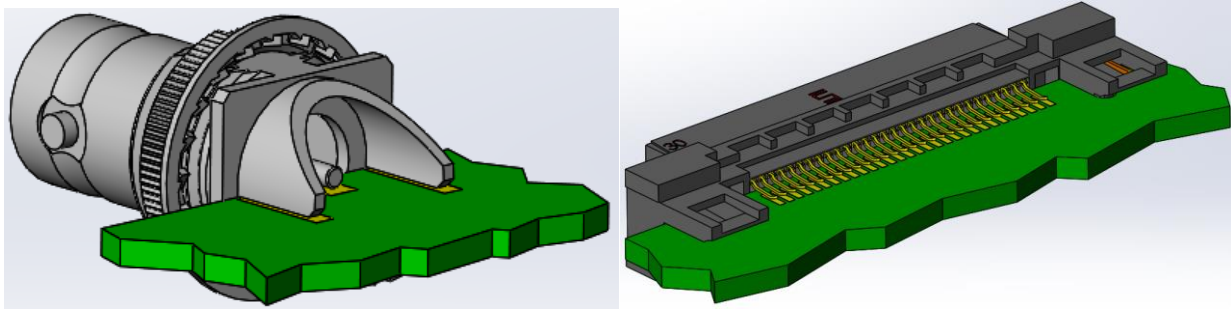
Edge Mounted RF Connector (Left); Edge Mounted Rugged High-Speed Socket Strip (Right)
